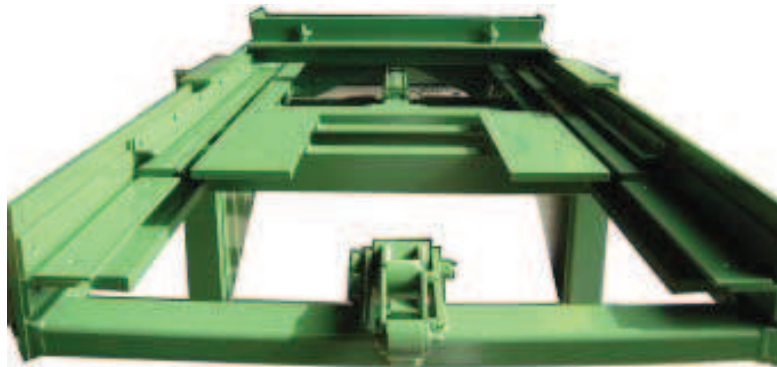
, New Style Pallet Feeder (Single Push Pallet Feeder)
